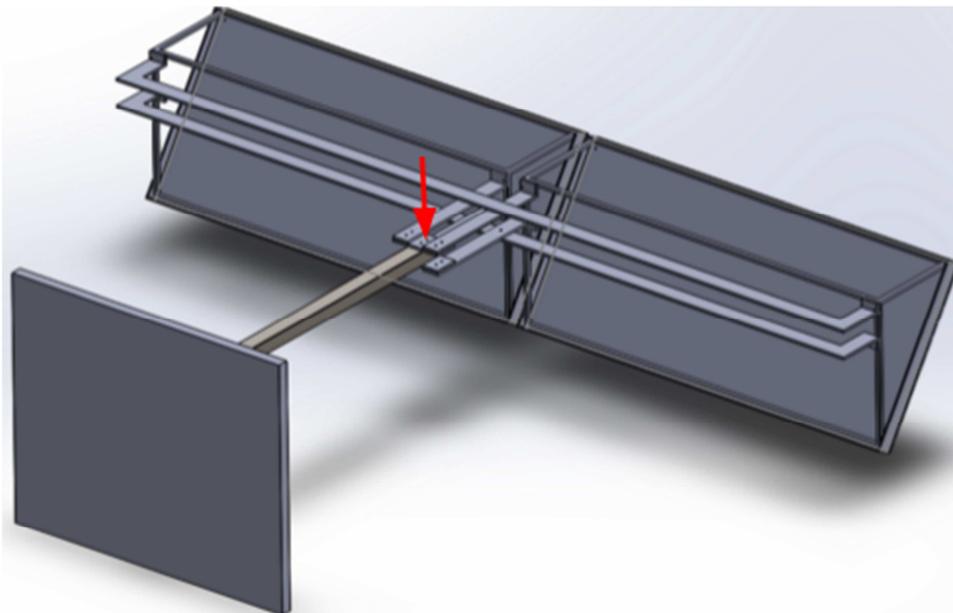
Two hex bolts and nuts are to be fastened onto the mount for easy removal.
